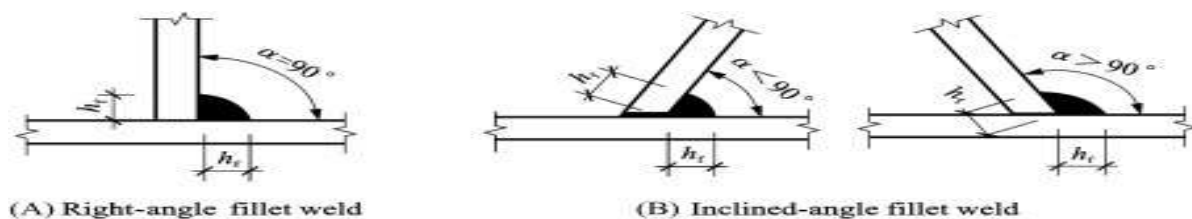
(a) Right Angle fillet weld (b) Inclined- angle fillet weld [9,10]
